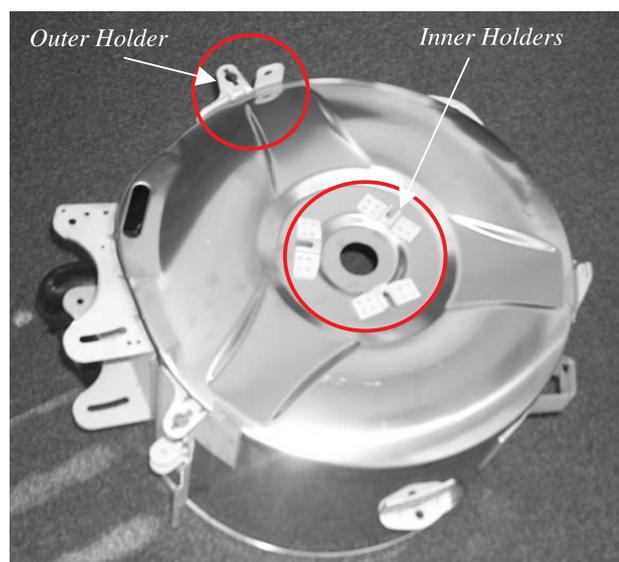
Holder cross welded on the drum of a washing machine
